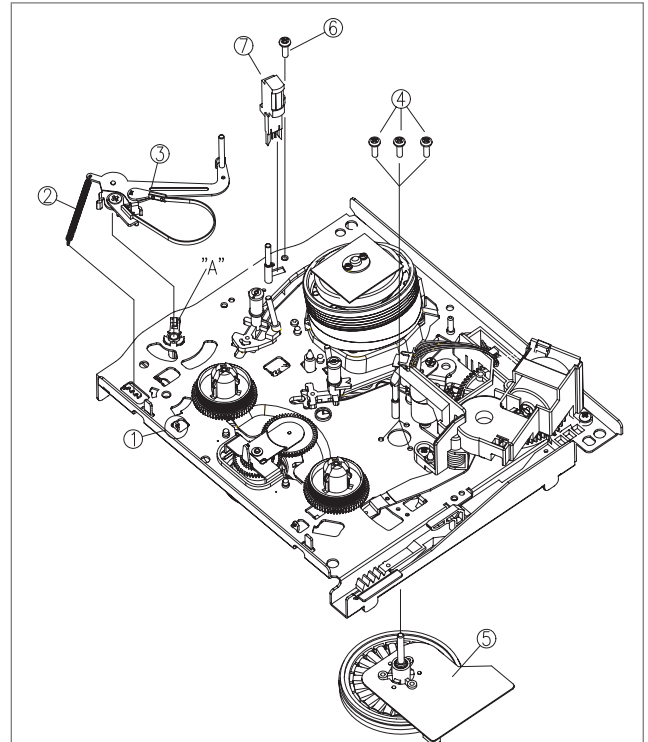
Disassembly of the TENSION BAND ASS'Y, CAPSTAN MOTOR and the FE HEAD
